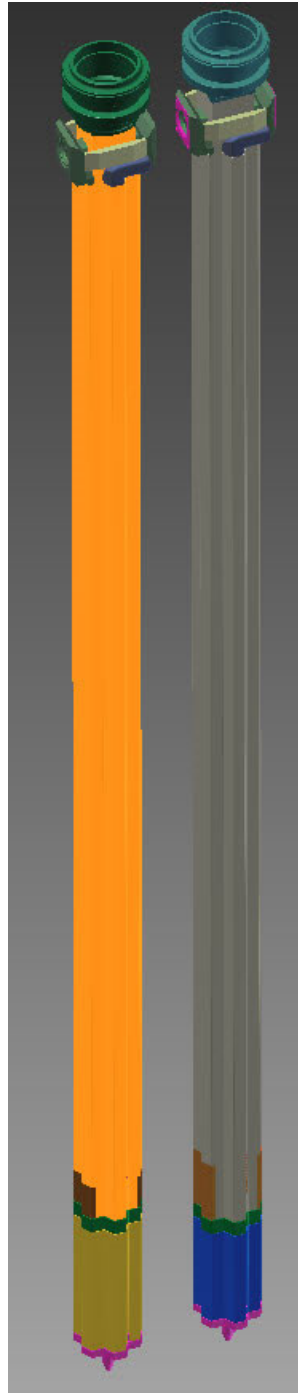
The tungsten target assembly (left) and the uranium target assembly (right) are shown side by side. These two target assemblies are physically interchangeable but offer different performance.
